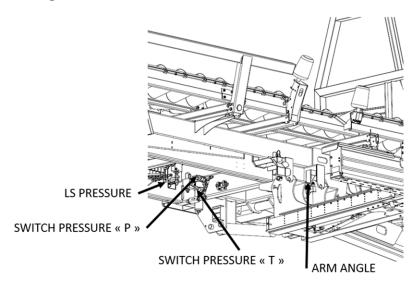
Locations of the Pressure and Arm Angle Sensors
